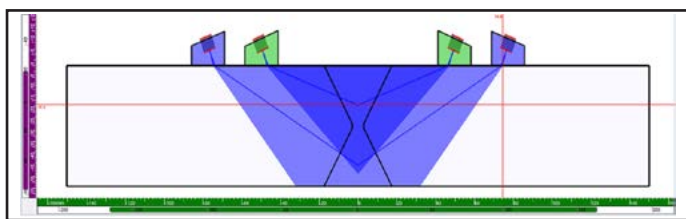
Exemplary design of TOFD technique tests with division into zones using the NDT Setup Builder software developed by Olympus; joint thickness: 52 mm; beam intersection point for the first pair of heads is located at a depth of 17 mm, for the second pair of heads it is located at a depth of 43 mm
